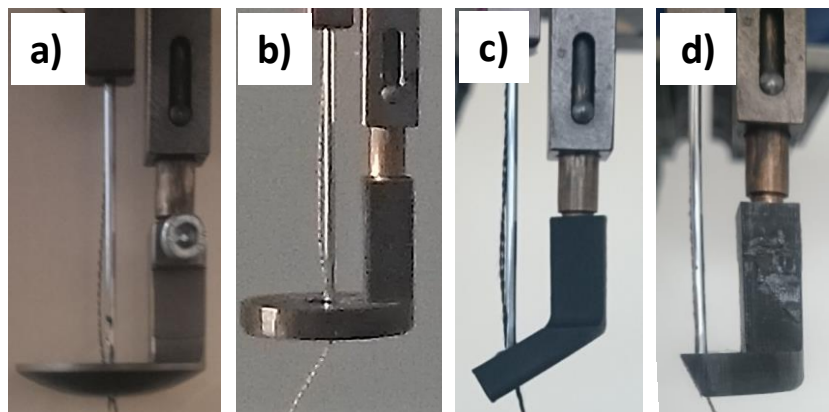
a) The former presser foot used on previous tufting process and, the 3D printed presser feet with plane bottom surface used for b) general reinforcements, c) inclined insertion of 60° and d) corner reinforcements of the omega stiffeners.
